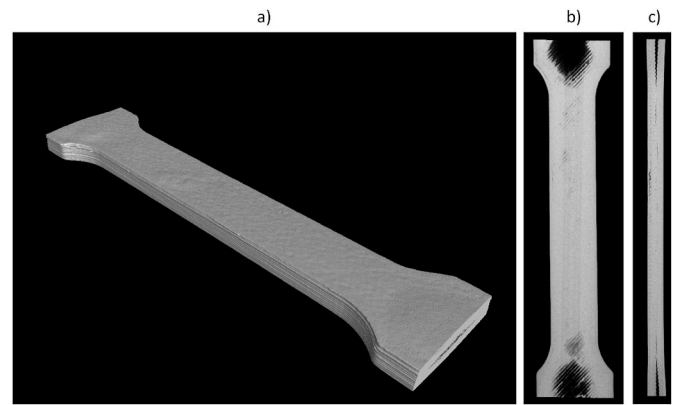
μ XCT reconstructed 3D object: a) perspective view of the specimen; b) section cut view of a plan parallel to the top face representing the middle of the specimen; c) section cut view of a plan parallel to the side face of the gauge length representing the middle of the specimen.
